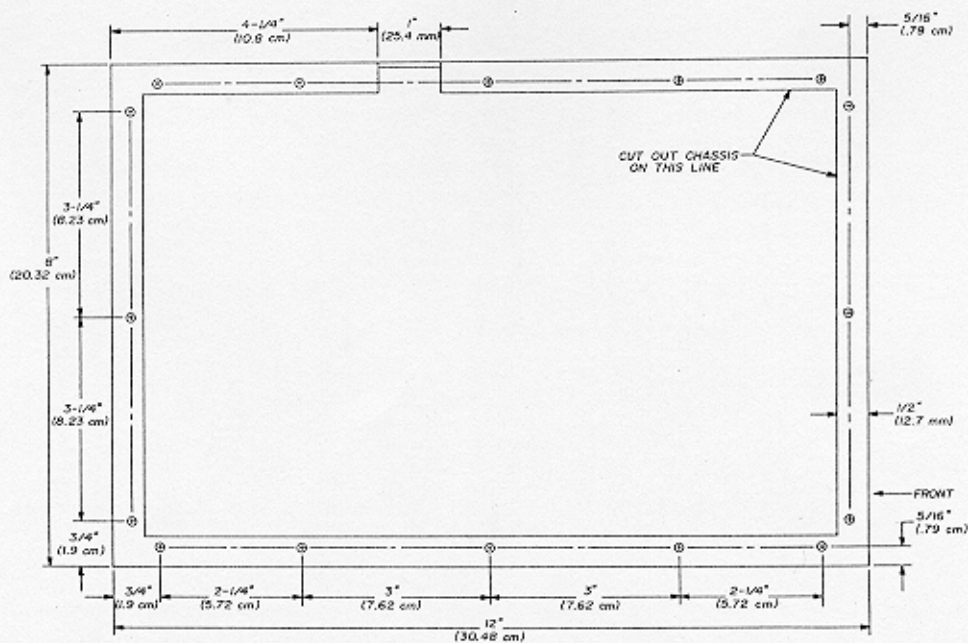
Top view of the lower chassis showing the large cutout made with a nibbling tool. Chassis is a Bud AC424 or equivalent. All holes are 9/64 inch (3.5mm).
